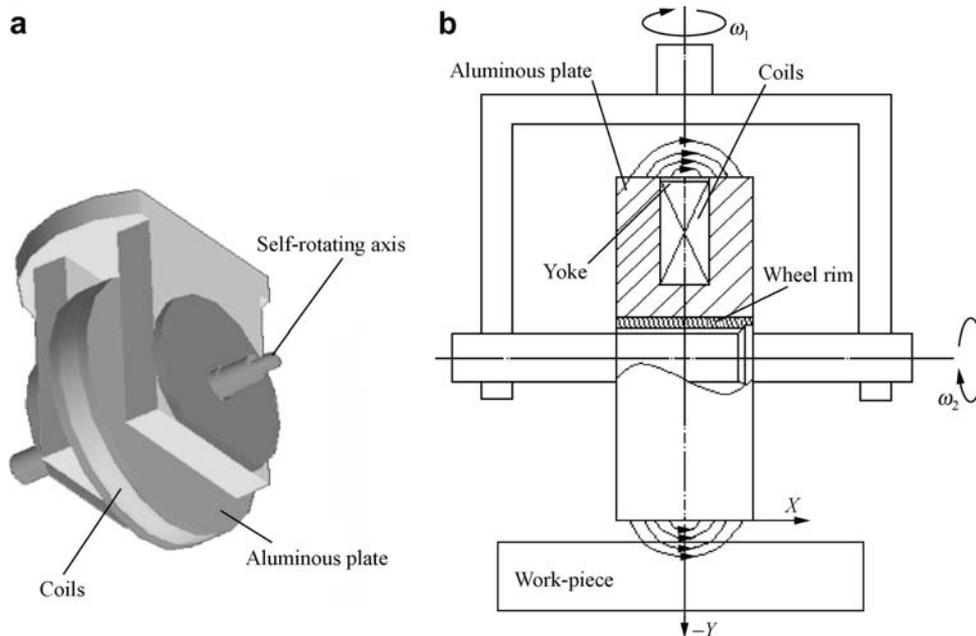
Wheel-shaped polishing tool. (a) Three-dimensional structure; (b) rotating axes and magnetic field lines generated.
